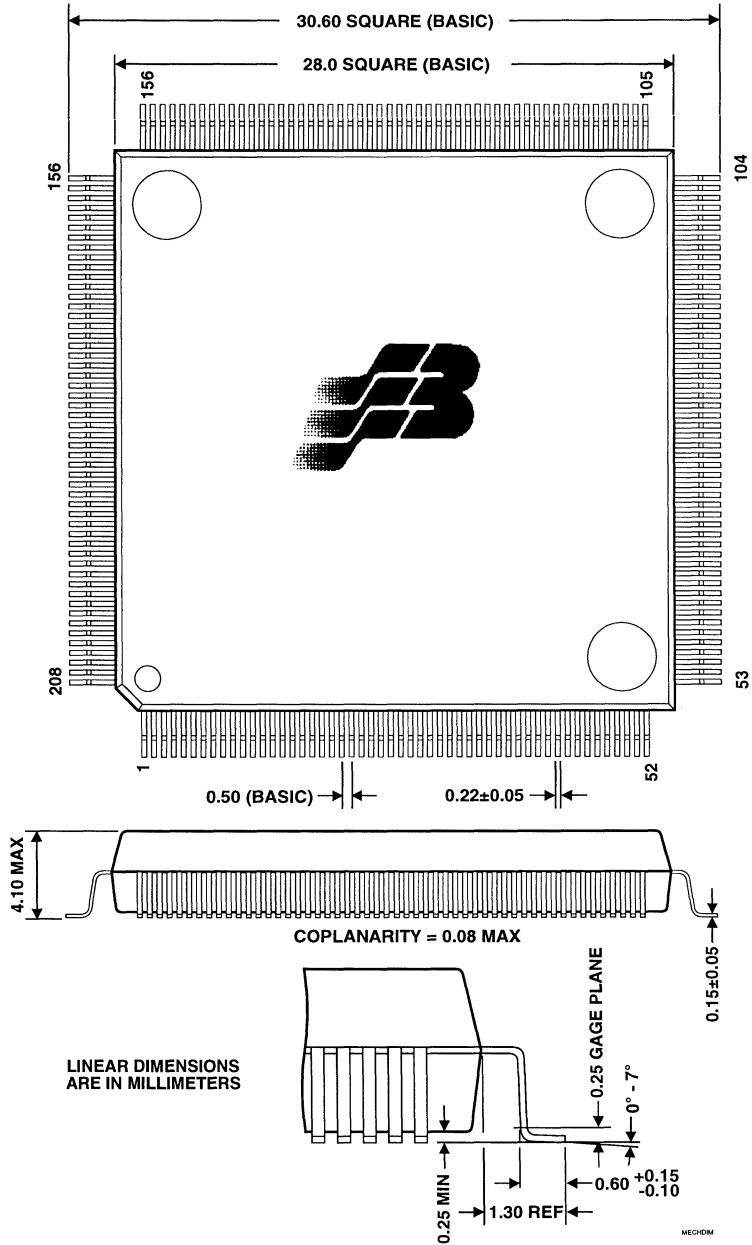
208-pin PQFP Mechanical Dimensions
